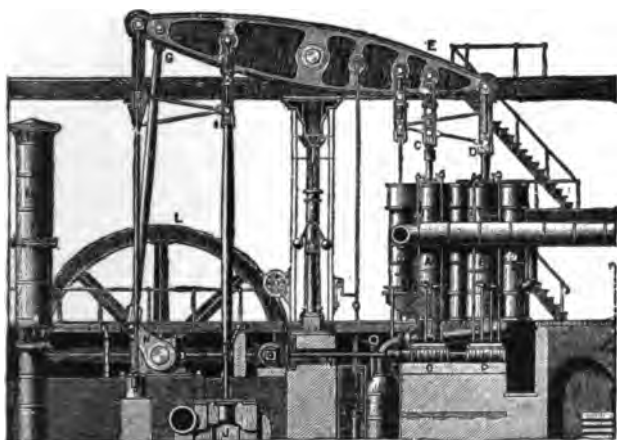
DOUBLE-CYLINDER PUMPING-ENGINE.
